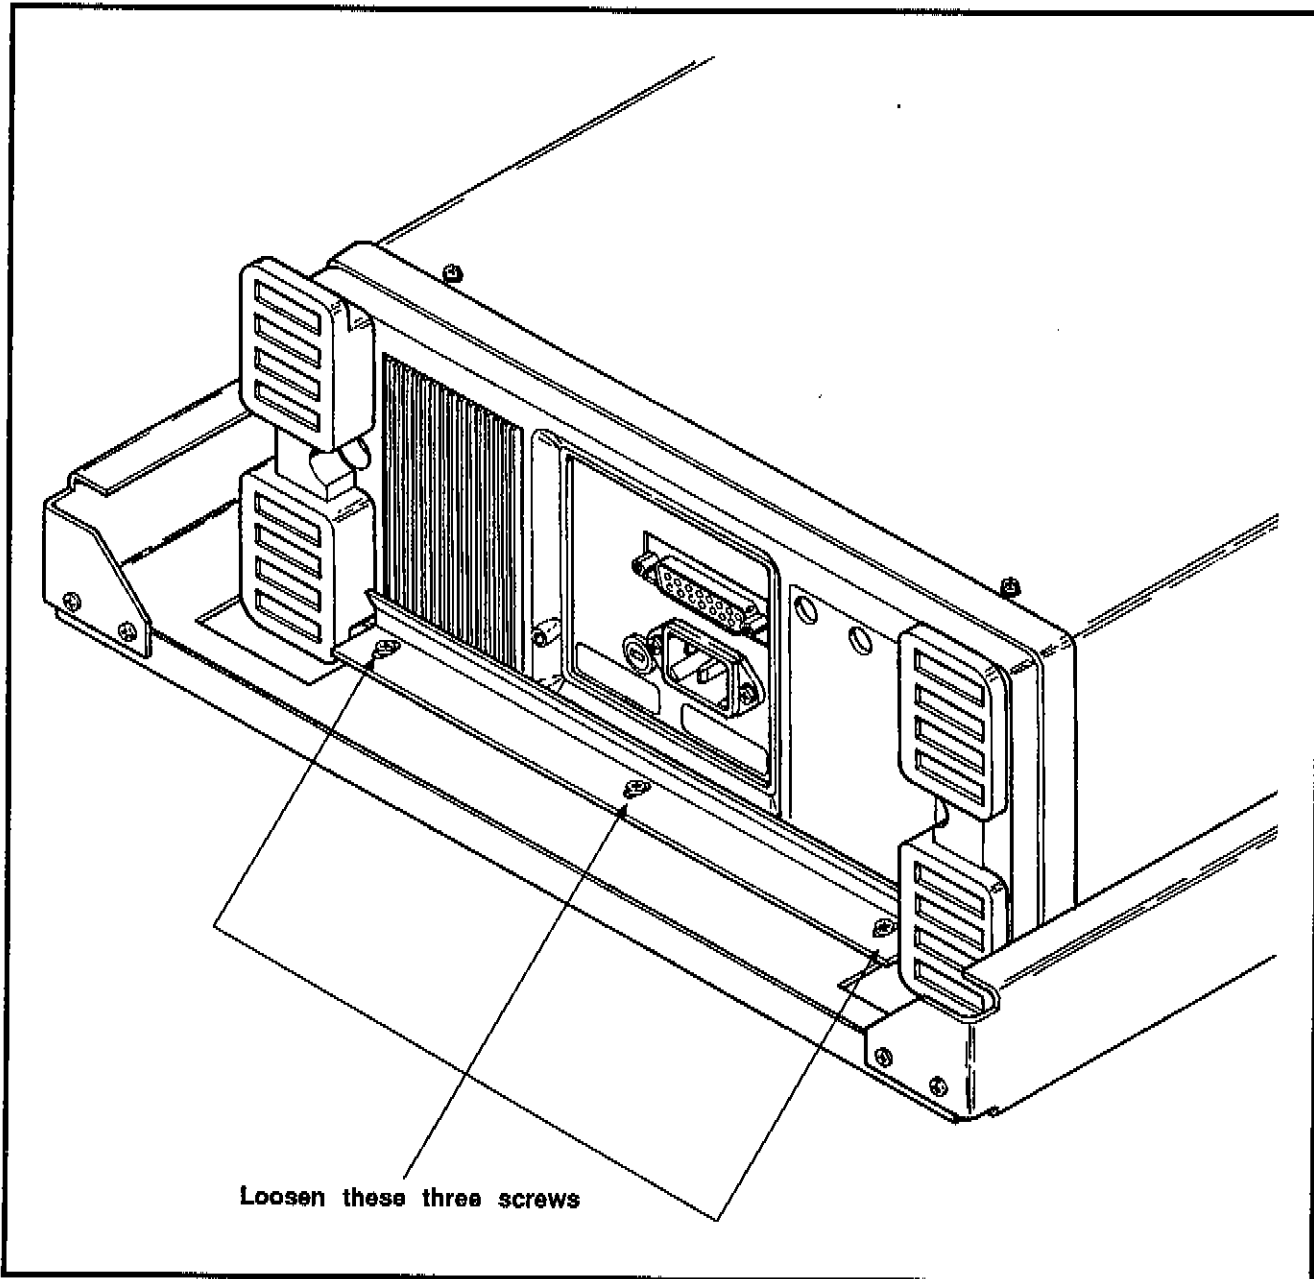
Rear of cradle-mount showing retaining bar and three securing screws.
